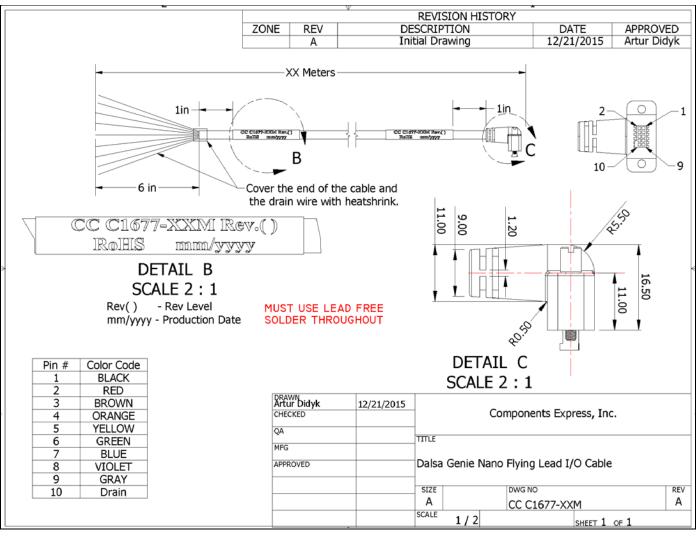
Cable Assembly: Right-Angle I/O Bunt End
